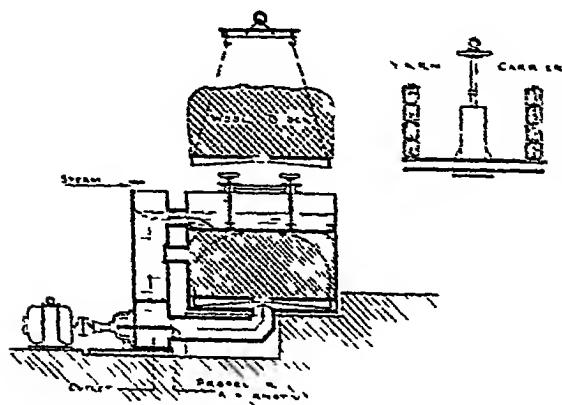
Obermaier stock-and yarn-dyeing machine.
